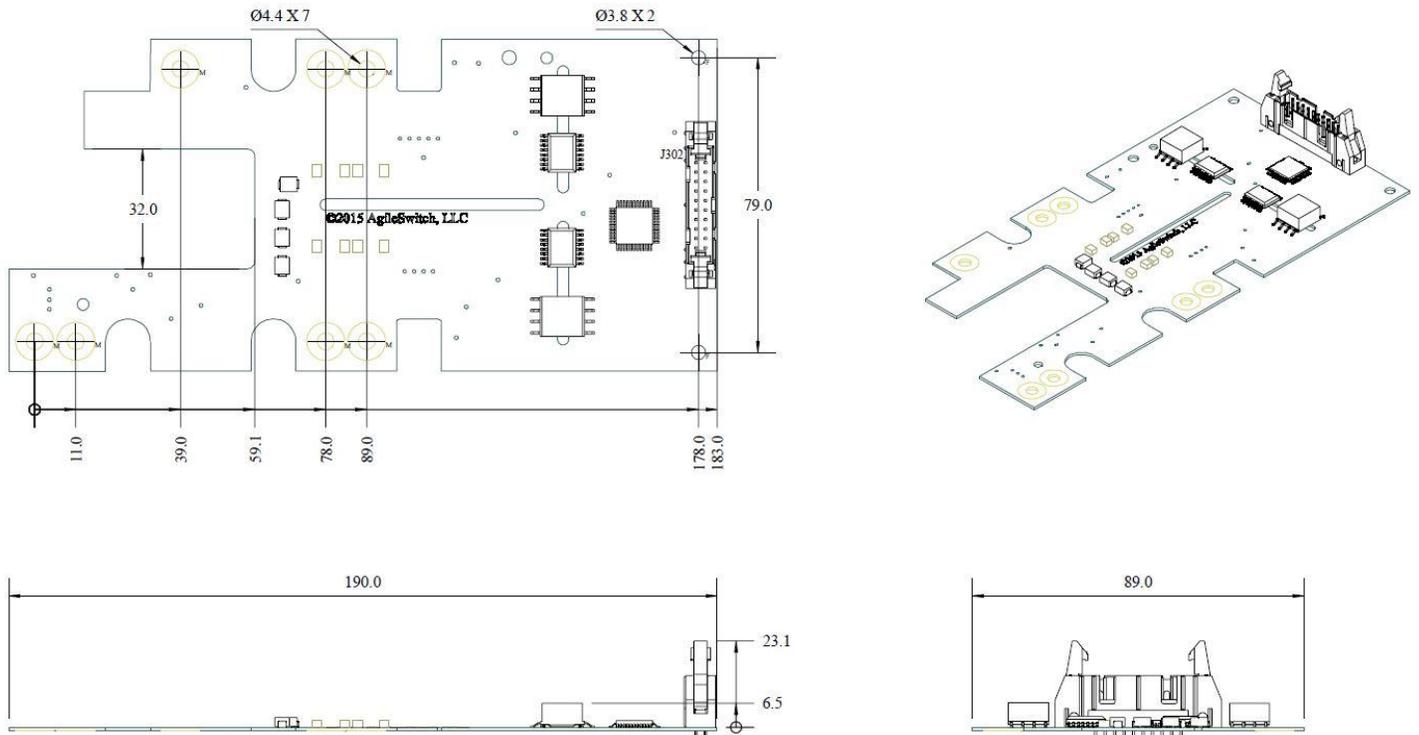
Dimensions of the PPEM-PrimePACK Electrical Series IGBT driver (+/- 0.1mm)
